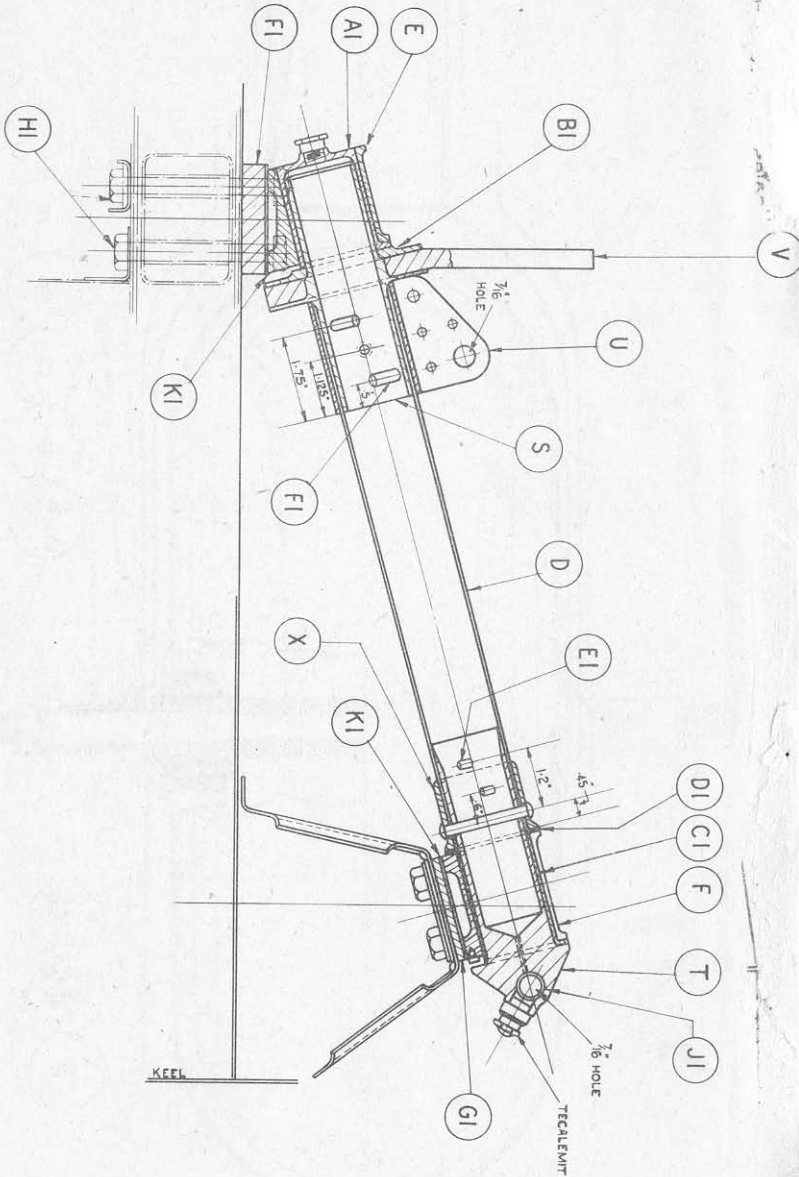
D. TAIL WHEEL UNIT TORQUE TUBE
